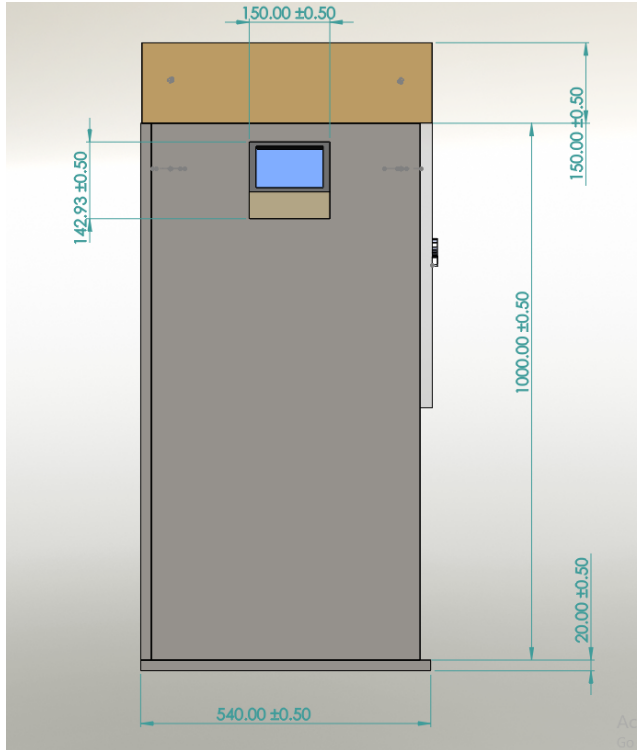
Side View of SaniTech B-Clean with Dimensions in millimeters
